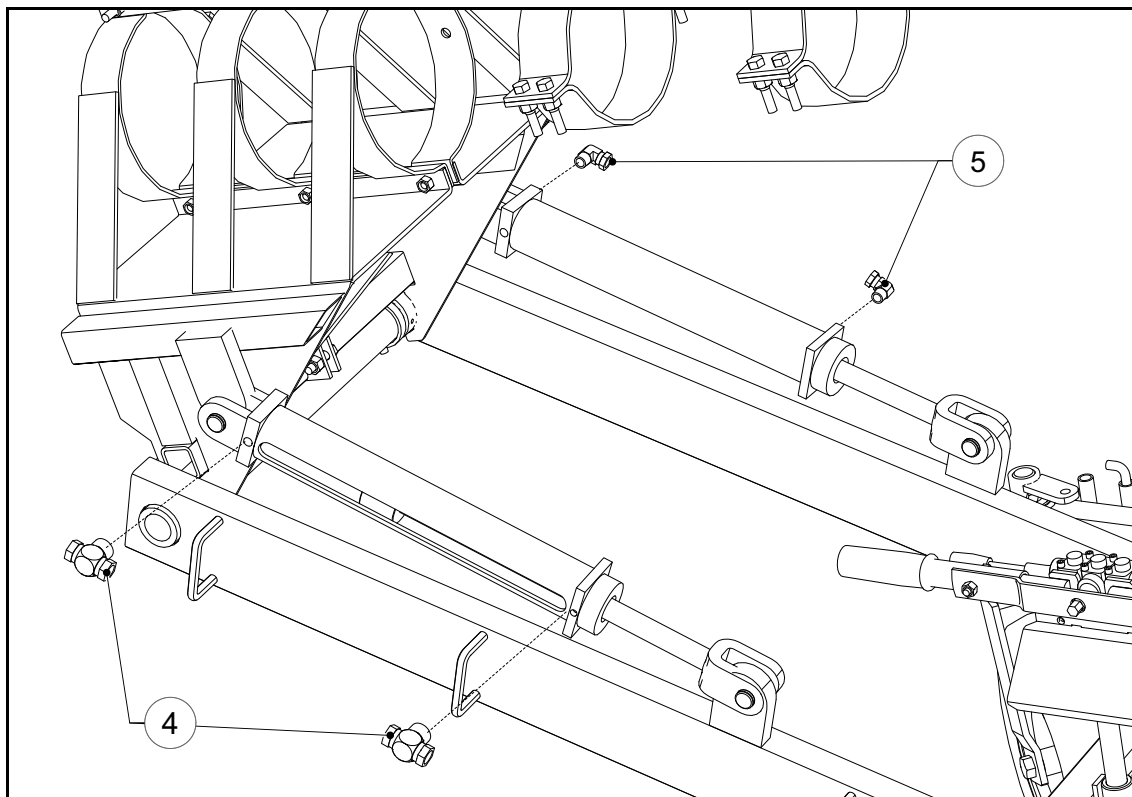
Attaching Fittings to the Wheel Move Hydraulic Cylinders
